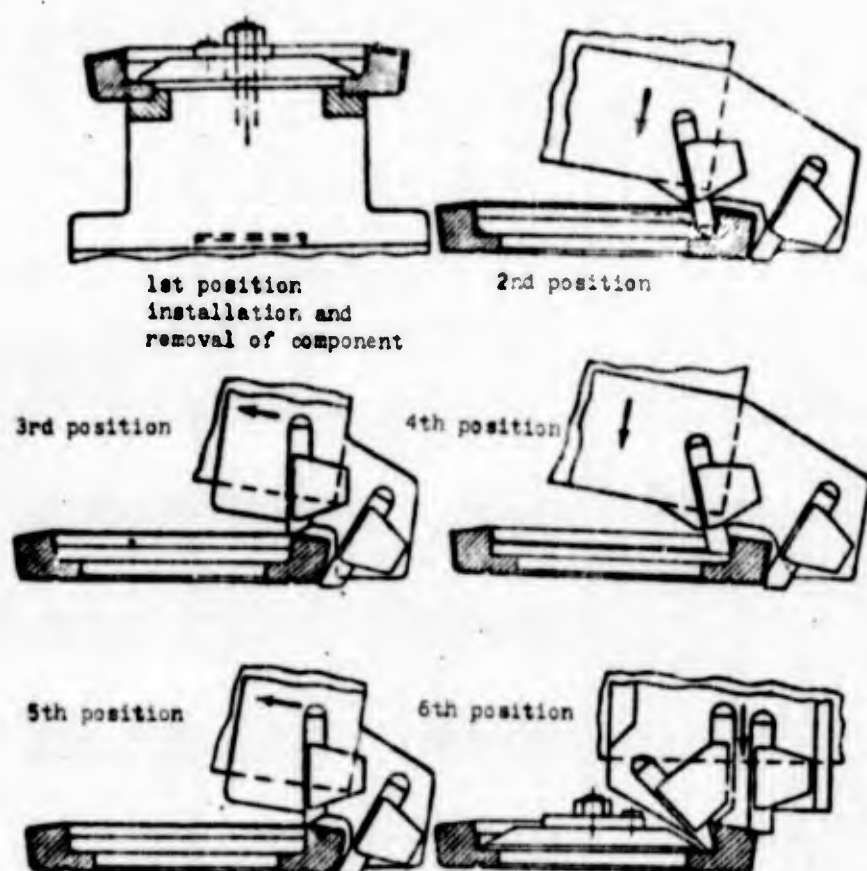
Arrangement of semiautomatic six-spindle machine for machining of bevel gears.
